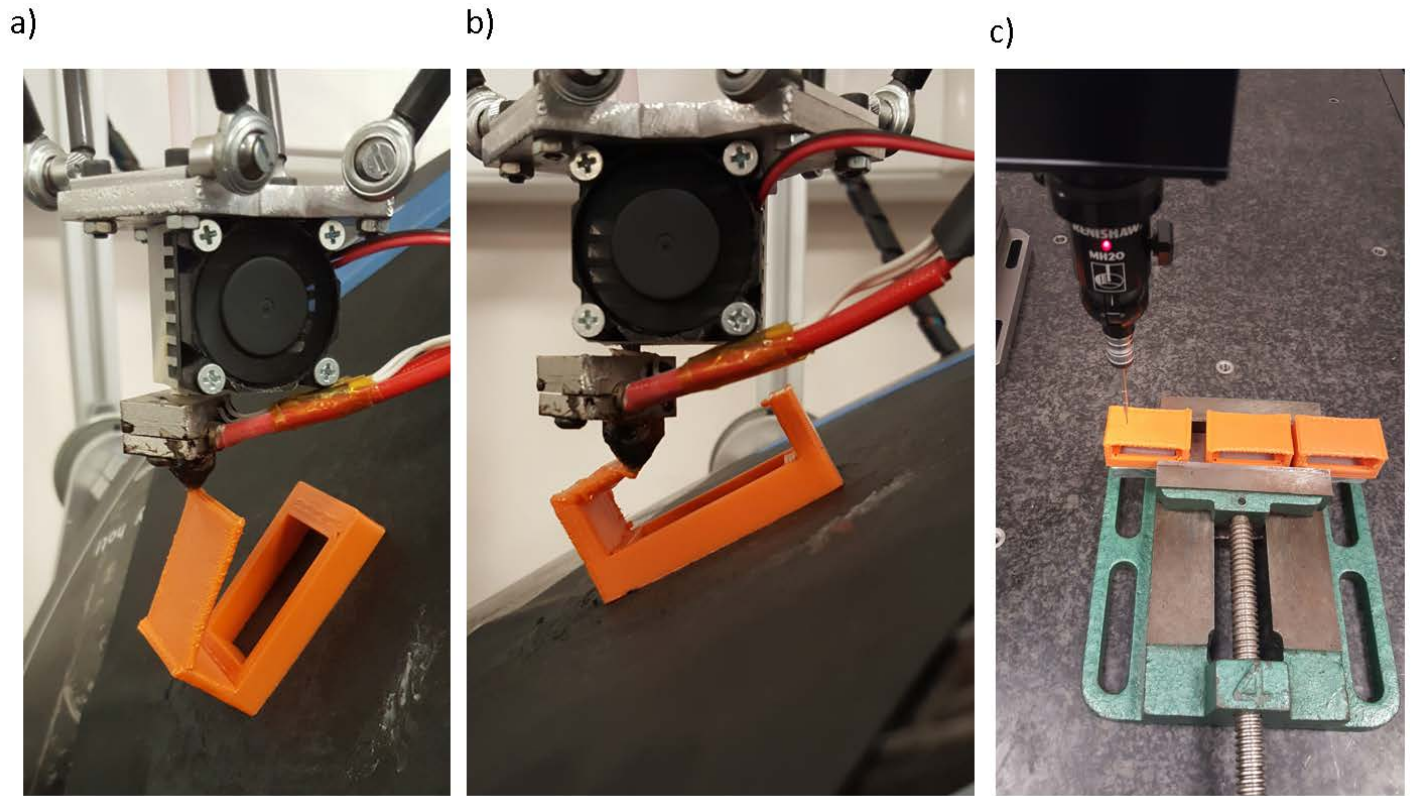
Fabrication of a) part with high slice angle, b) low slice angle using 5-Axis AM 3D printer. c) CMM measurement of surface deviation of sample parts
